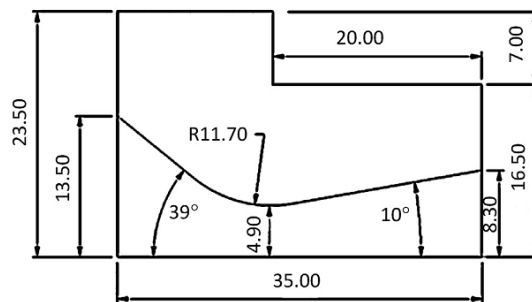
Layout De Laval nozzle geometry (dimensions in millimeters).
